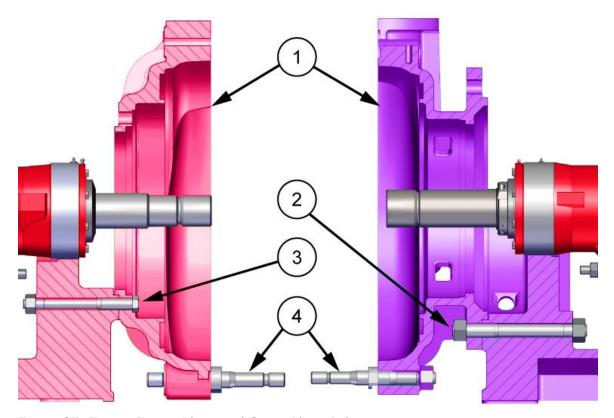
Fitting Frame Plate and Cover Plate Bolts.
